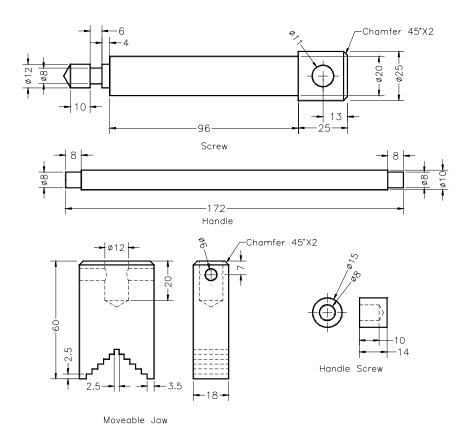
Views and dimensions of the Screw, Handle, Movable Jaw, and Handle Screw
